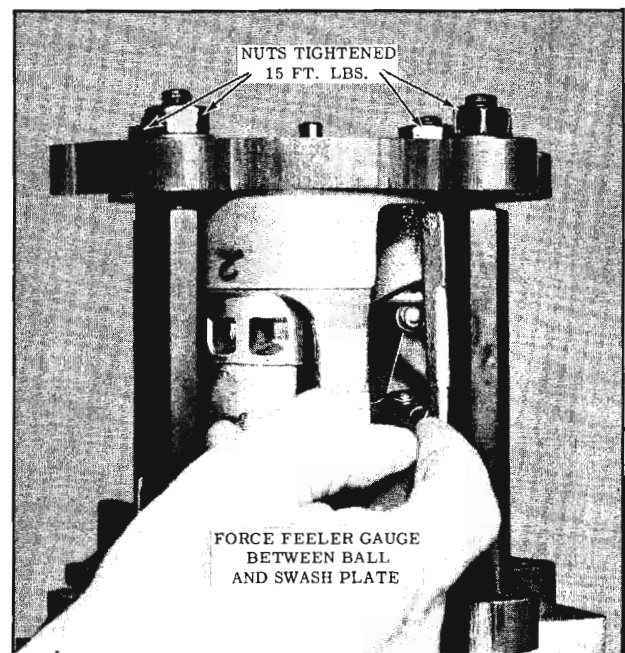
Checking Drive Ball to Swash Plate Clearance
